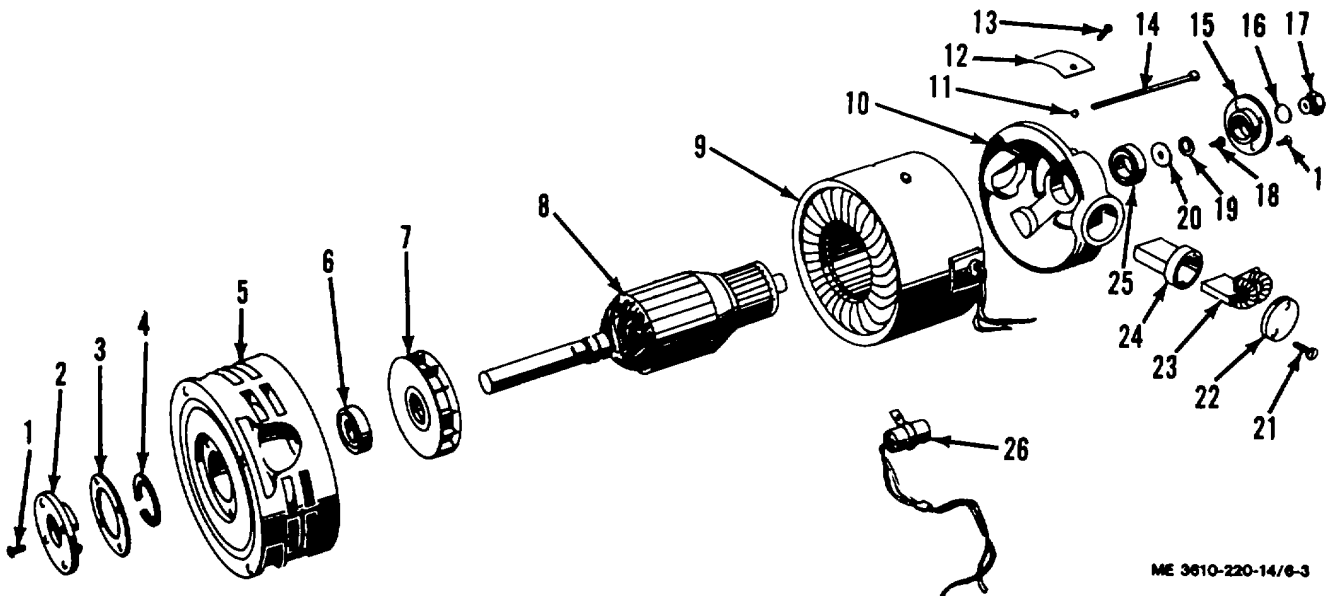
Vacuum turbo-compressor motor, exploded view.
